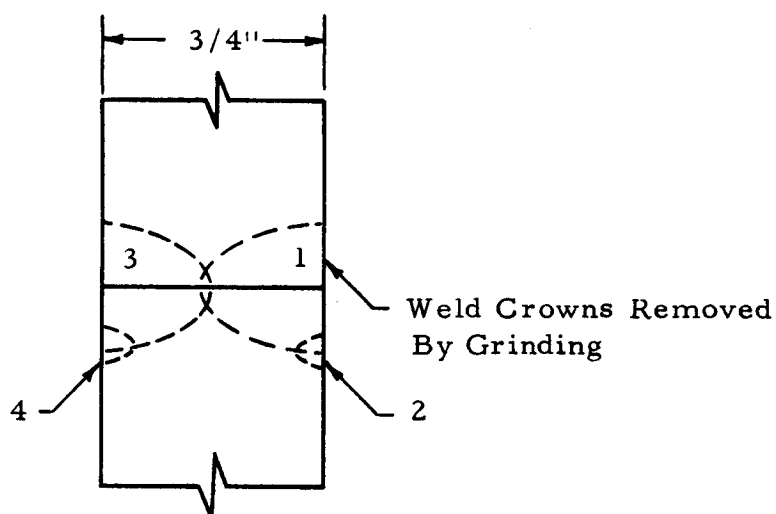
WELD CONFIGURATIONS OF HYDRAULIC BULGE PANELS A, B, C AND D
